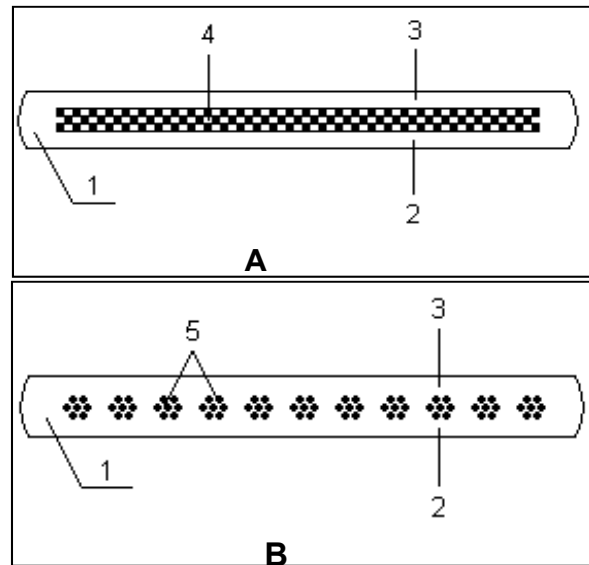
Conveyor belt cross-sections; A – rubber-textile; B – steel-cord; 1 – side protective edge; 2 – bottom cover layer; 3 – top cover layer; 4 – textile carcass; 5 – steel cord
